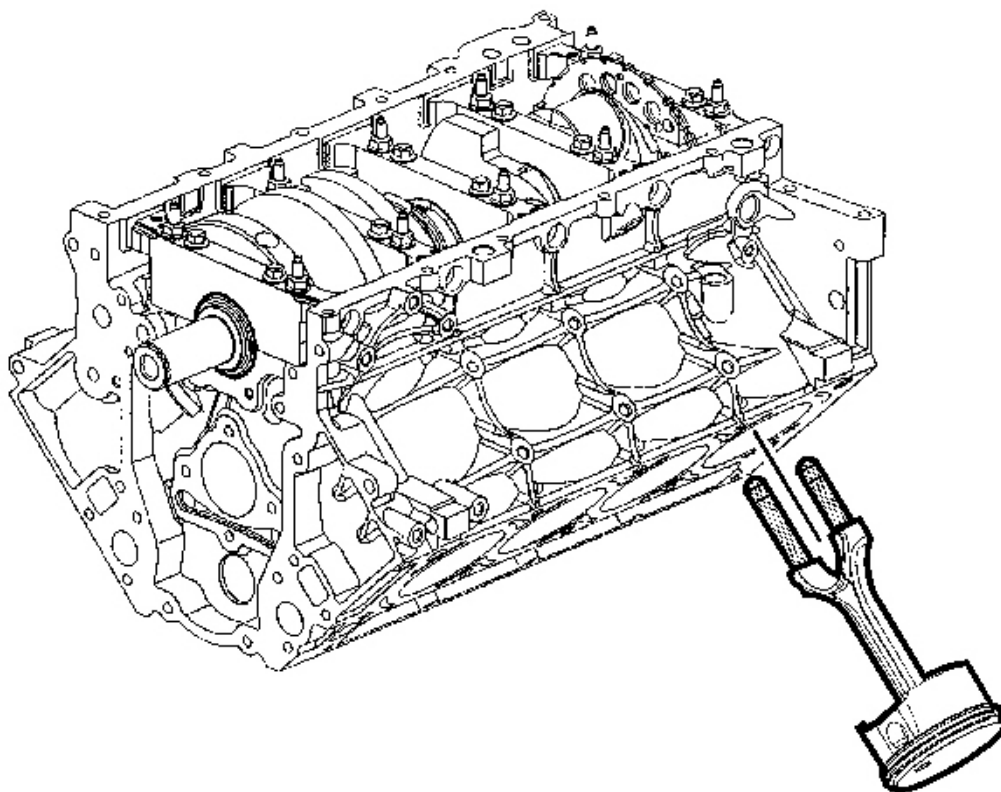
View Of Piston, Connecting Rod & Cylinder Bore
